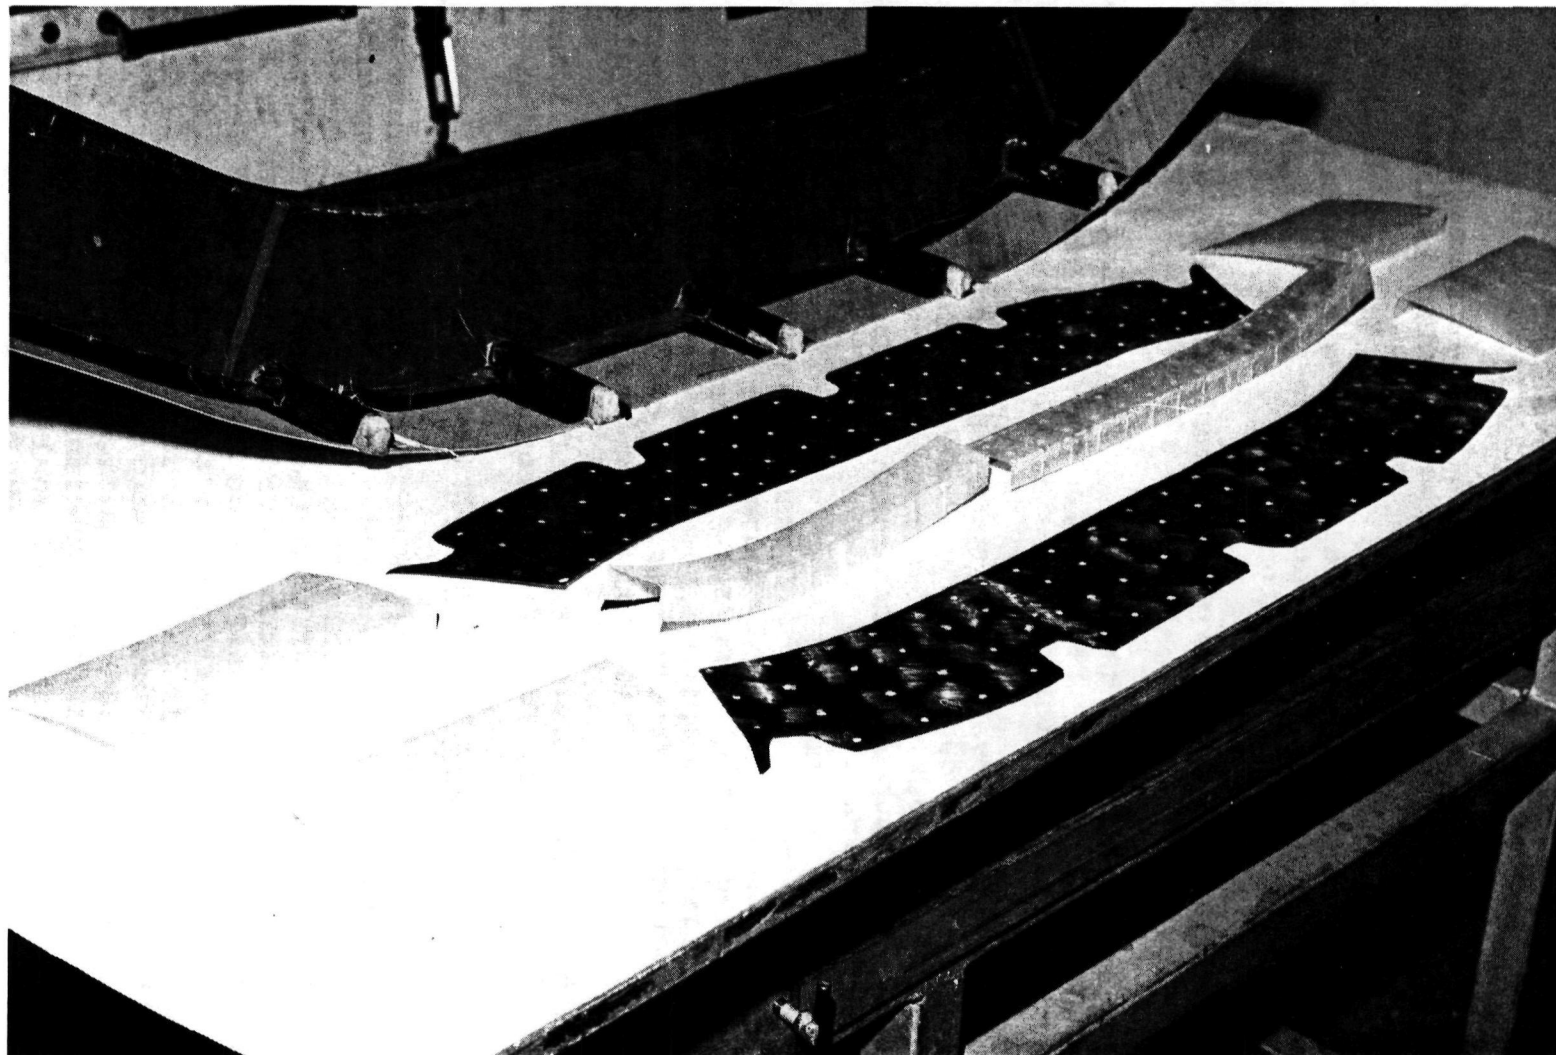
EWR 32381 IMPROVED FRAME SPECIMEN WITH CAUL PLATE ASSEMBLY.
